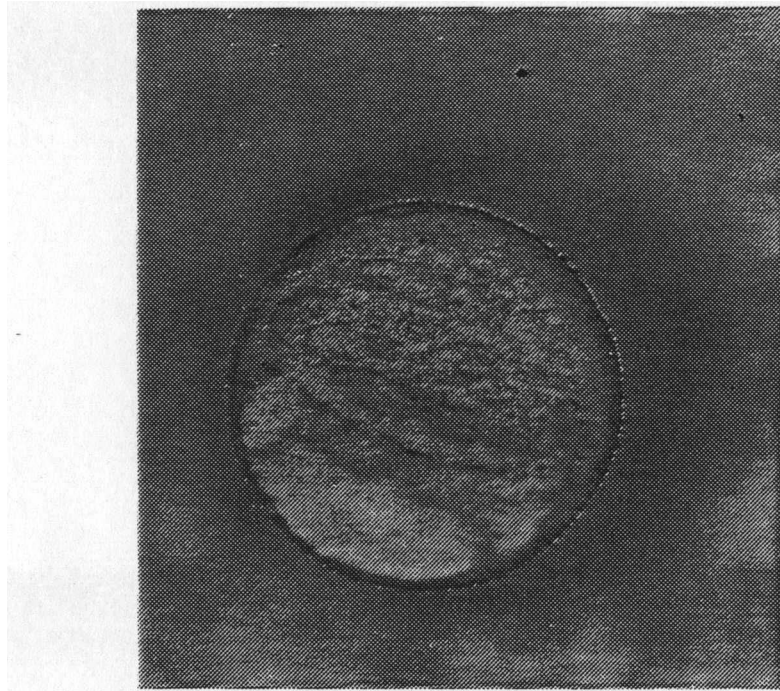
Fracture Surface of Sample No. 7. 36X.
